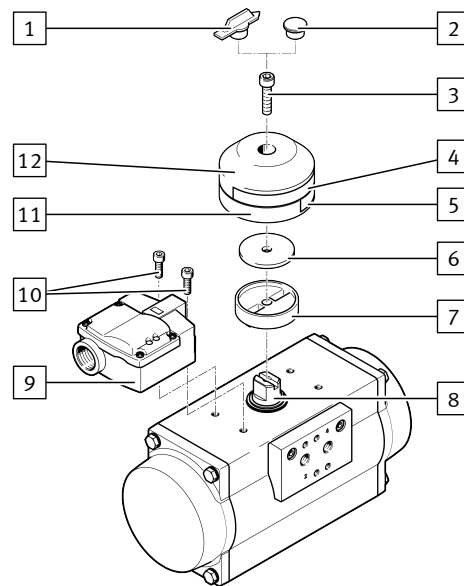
Mounting SRBG and SASF-...-V on the drive
